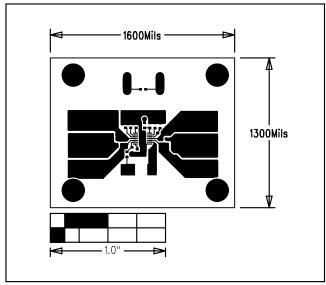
MAX8672 EV Kit PCB Layout—Component Side
